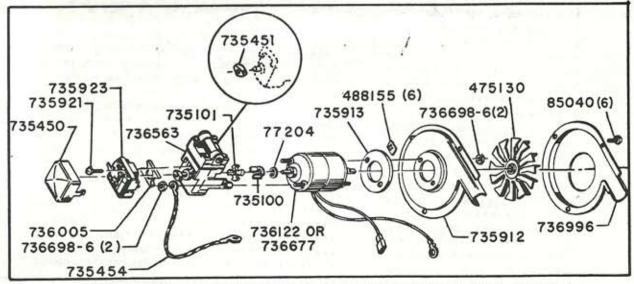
COMBUSTION AIR BLOWER ASSEMBLY 735915-8
